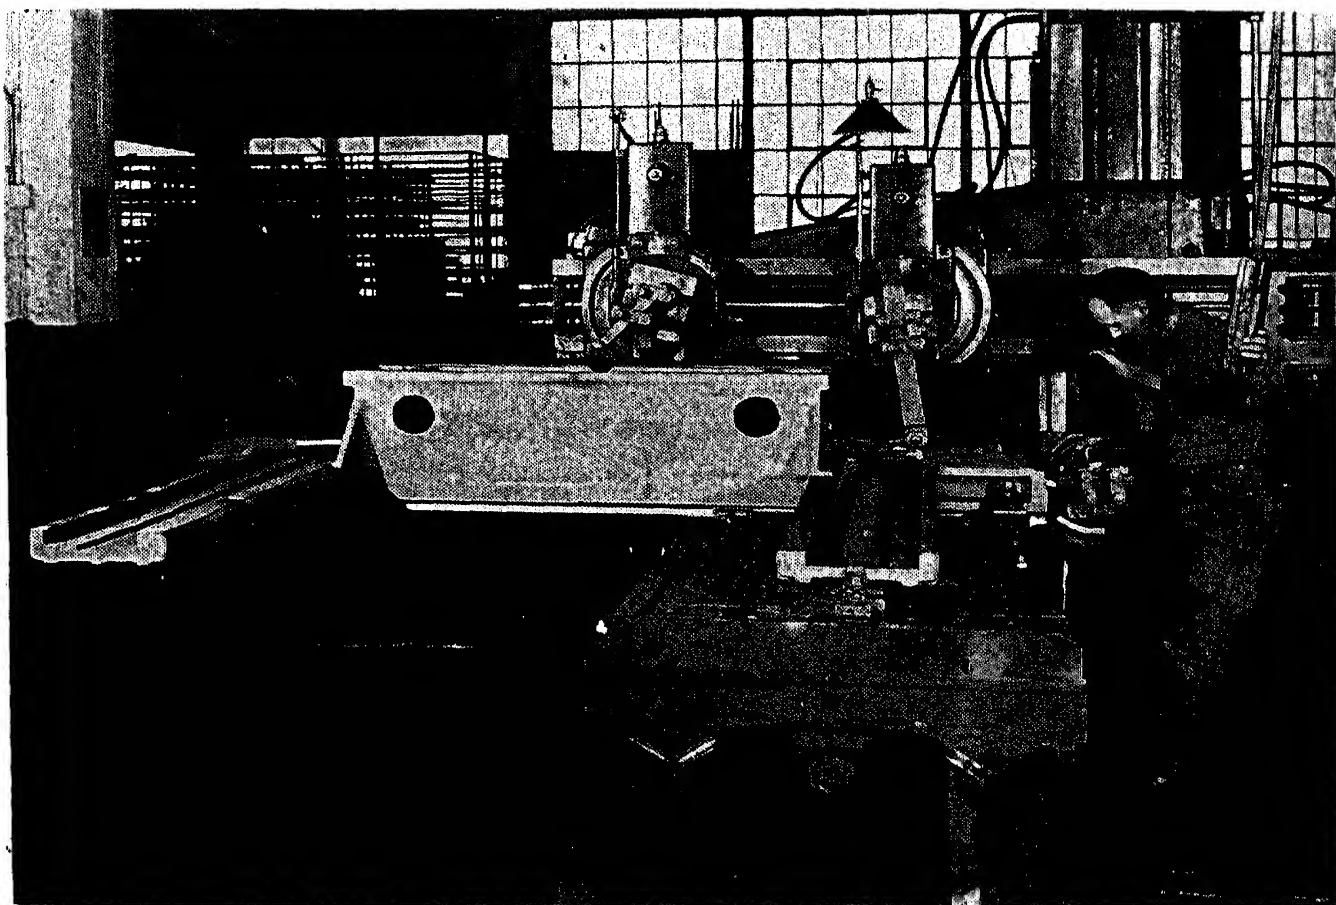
An openside hydraulic planer with a workpiece on the table extending beyond the rail. (Courtesy Rockford Machine Tool Co.)
